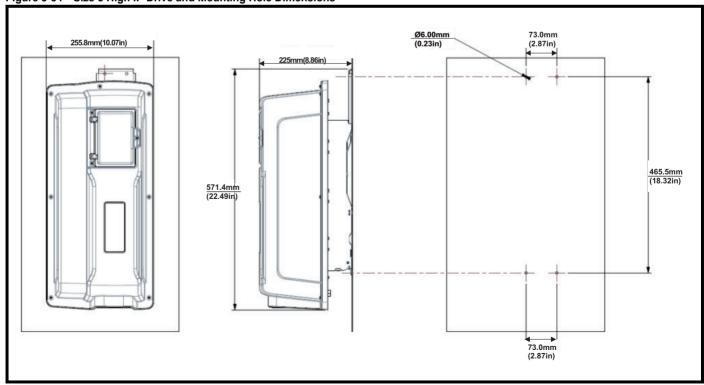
Size 4 High IP Drive and Mounting Hole Dimensions
